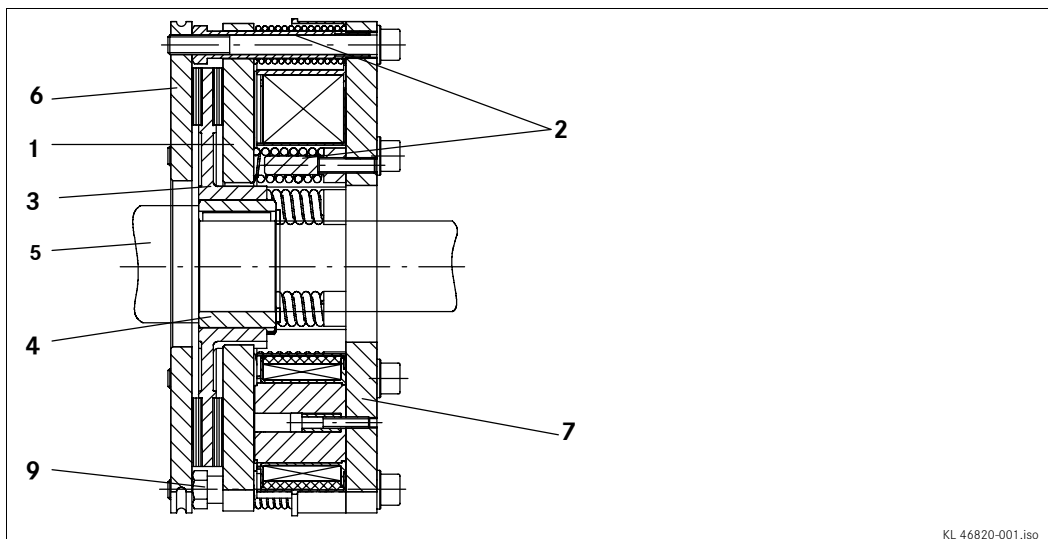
Design of the spring-applied brake INTORQ BFK468: basic module N (complete stator) + rotor + hub + flange
